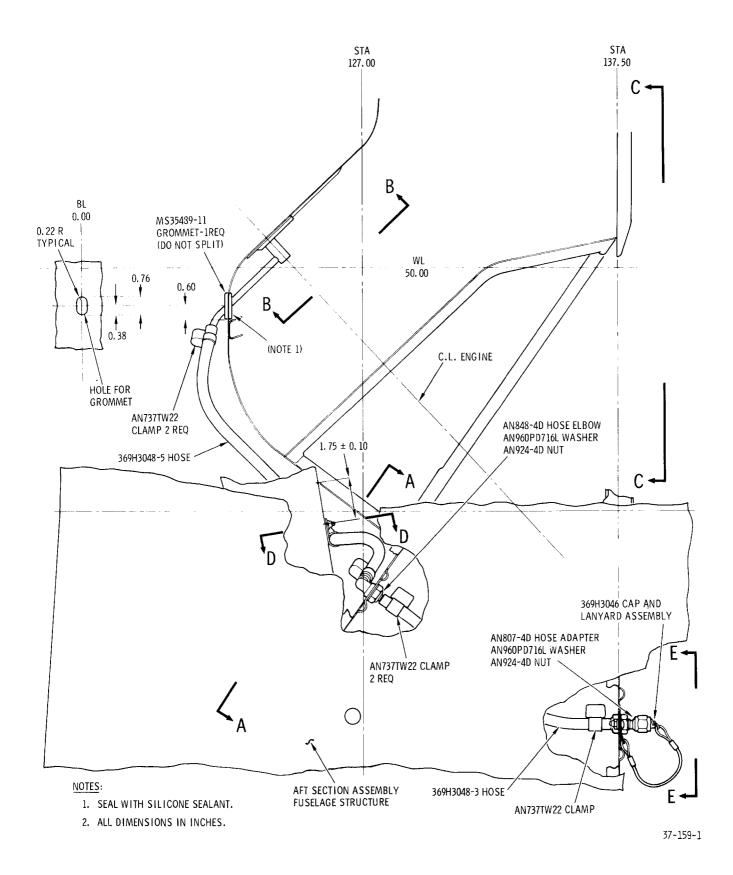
Installation of engine compressor water wash kit (sheet 1 of 3)
